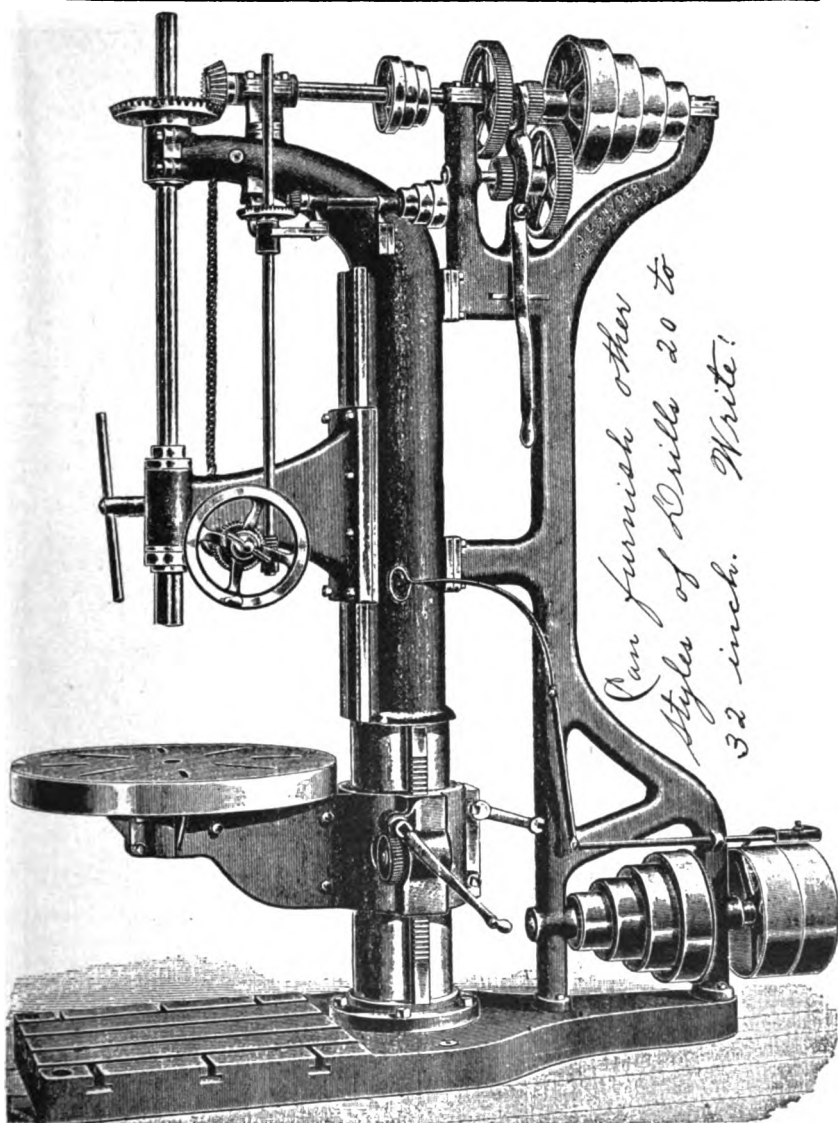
SNYDER'S 36-INCH STANDARD UPRIGHT DRILL.
